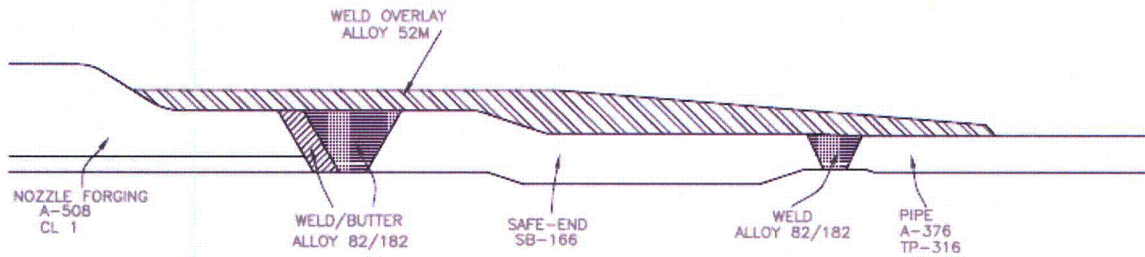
Illustration of Weld Overlay Design for Davis-Besse Pressurizer Spray Nozzle
